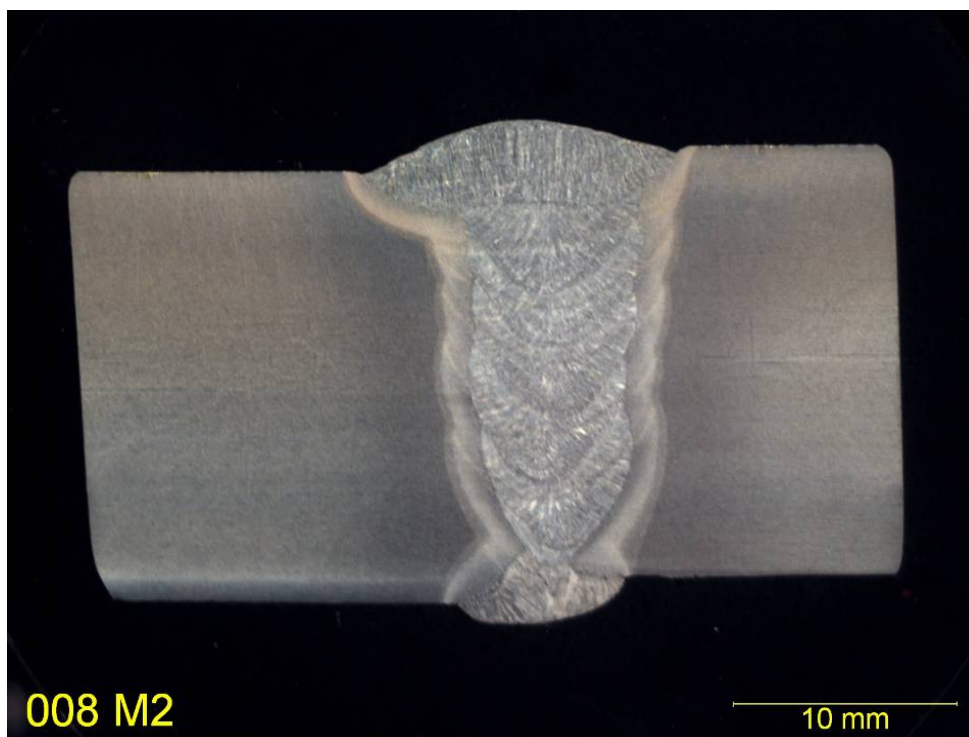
Photo-macrograph Showing Cross-section of Weld B8
